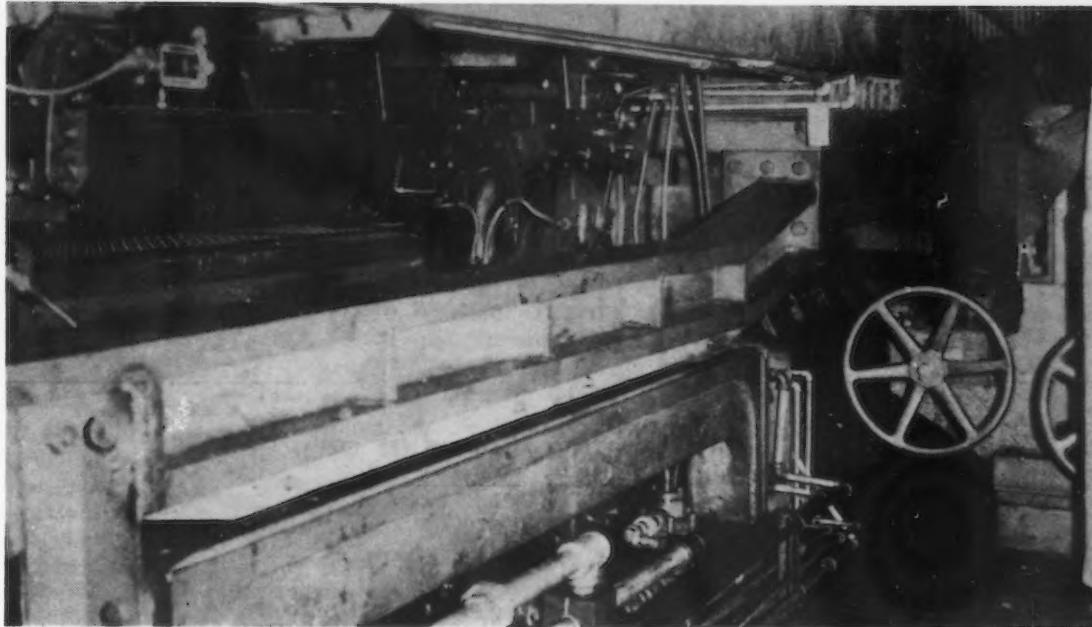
Coil box and uncoiler-leveler at entry end of the 84-in. recoiling and welding line.
